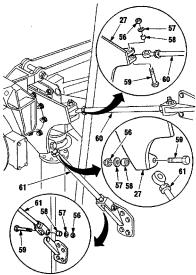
Tail Rotor Gearbox Strut Remova/Installation
